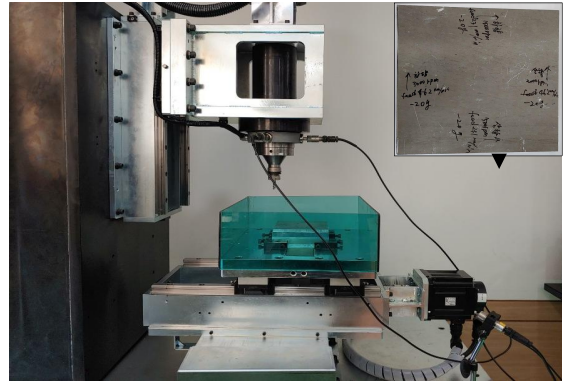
CNC machine tools and vibration measurement equipment and test pieces
